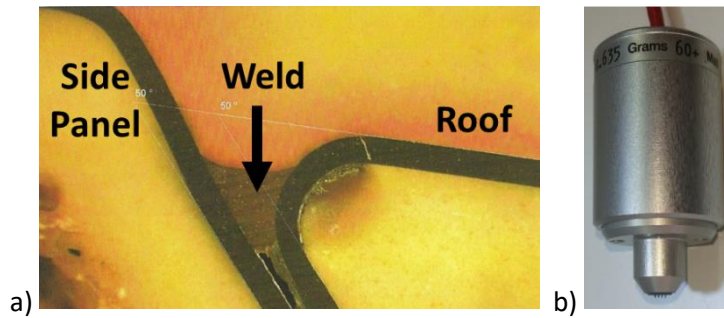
a) Weld profile macrograph with the different components; b) four-point probe used to measure the electrical conductivity.
